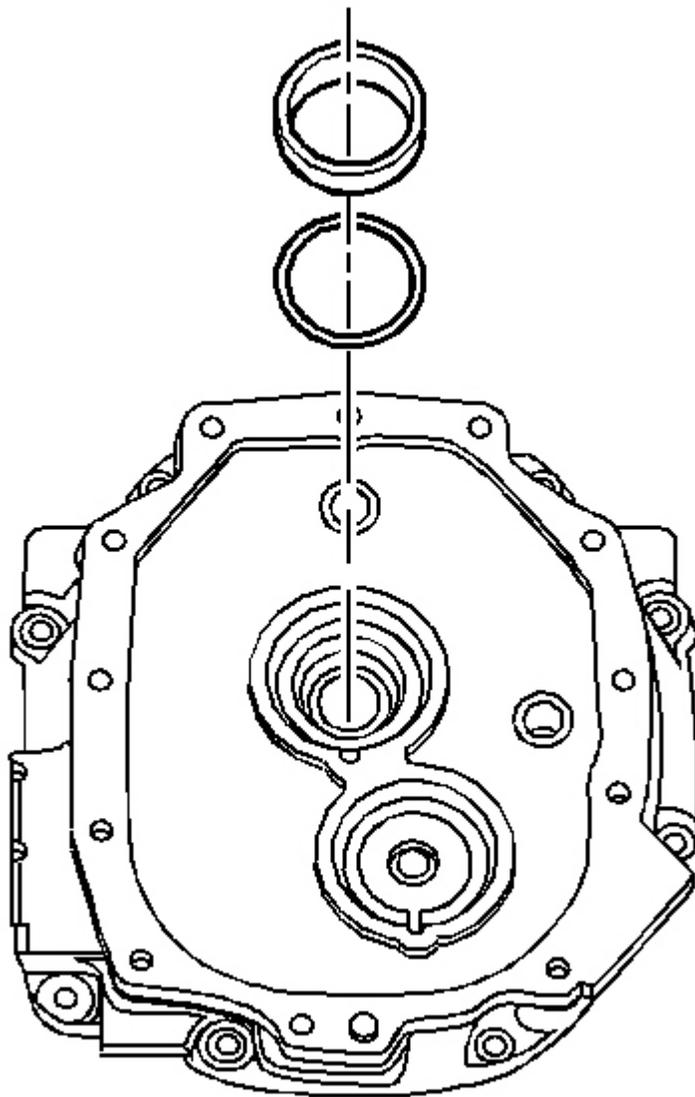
Installing/Removing Input Shaft Bearing Shim And Bearing Race
